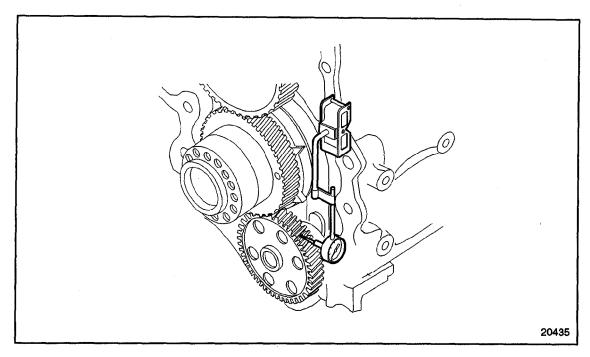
Oil Pump Drive Gear-to-Crankshaft Gear Lash Measurement
